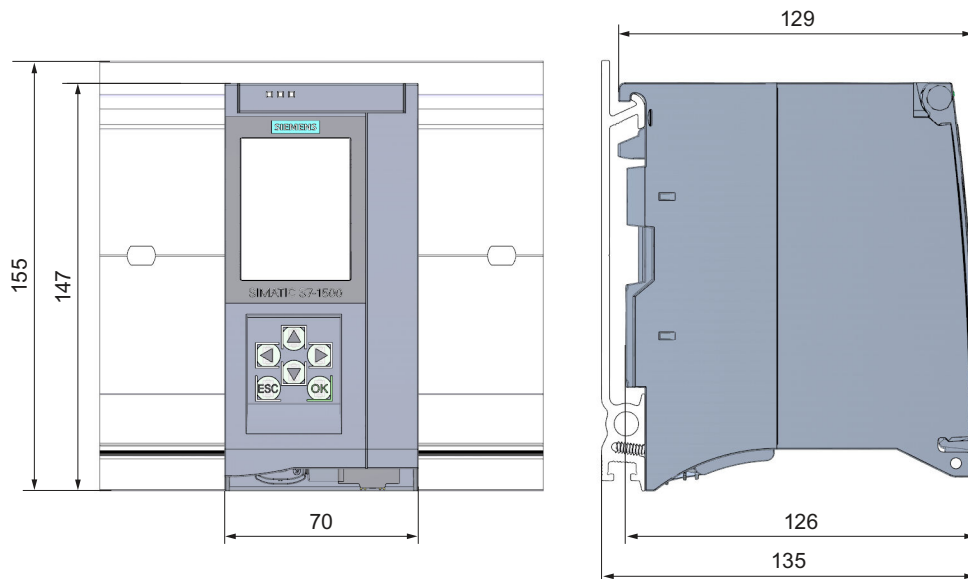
Dimension drawing of CPU 1515R-2 PN, front and side views
